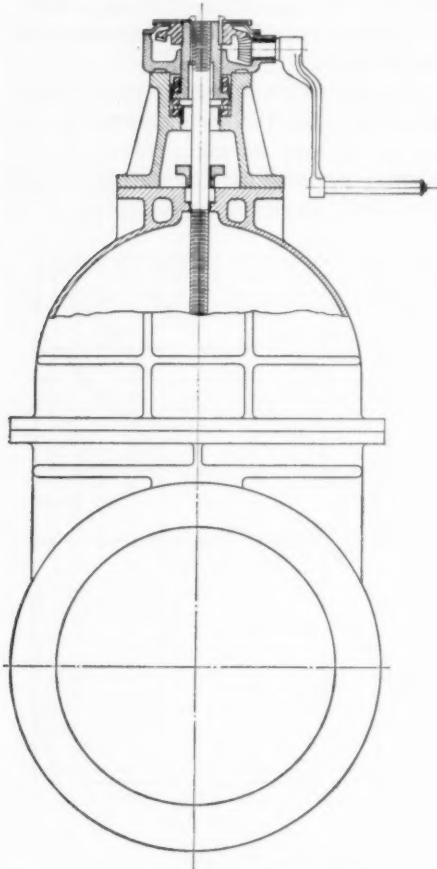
Ball-Bearing Operating Head on Inside-Screw Valve
